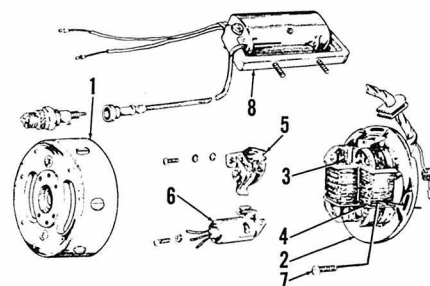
Exploded view of magneto assembly (ignition and lighting systems). Ignition timing can be changed by rotating stator plate (2) after loosening three screws (7).
